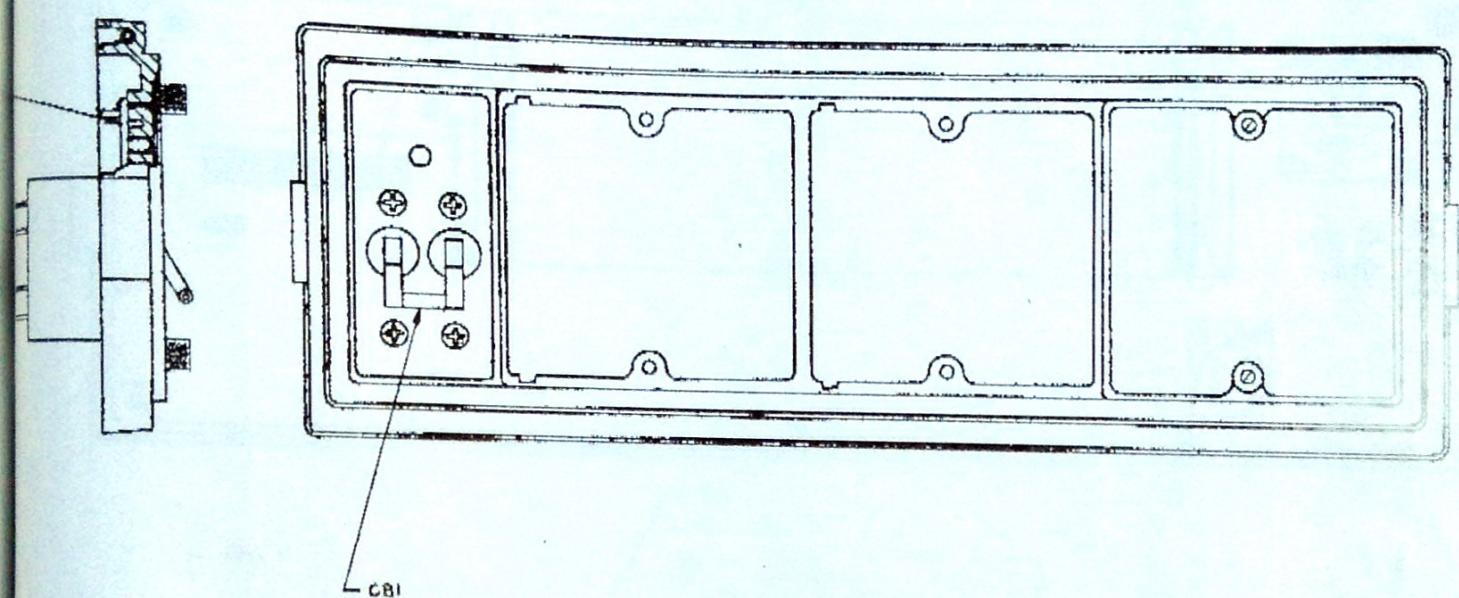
3A1 Front Panel Assembly (6628-2175)
